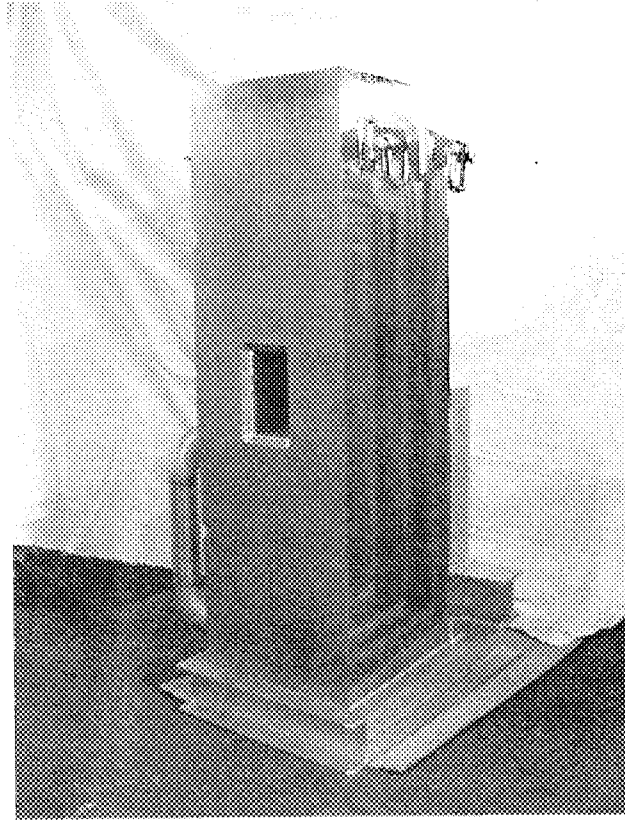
Fabricated mockup of 1/4 radial channel shield block
